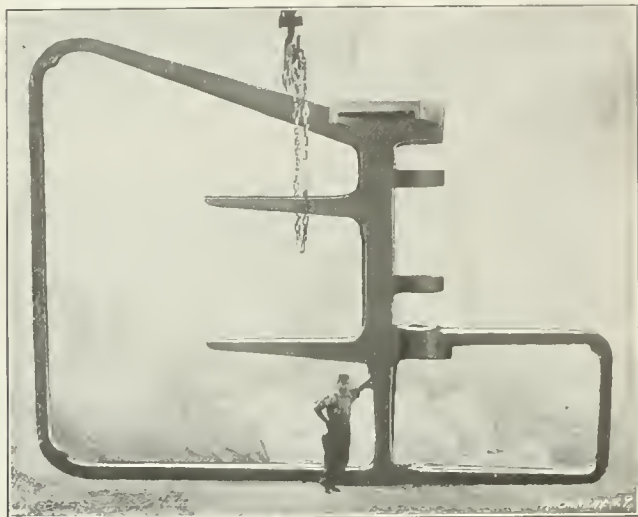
Steel Casting for the Rudder Frame of a Large Naval Vessel
